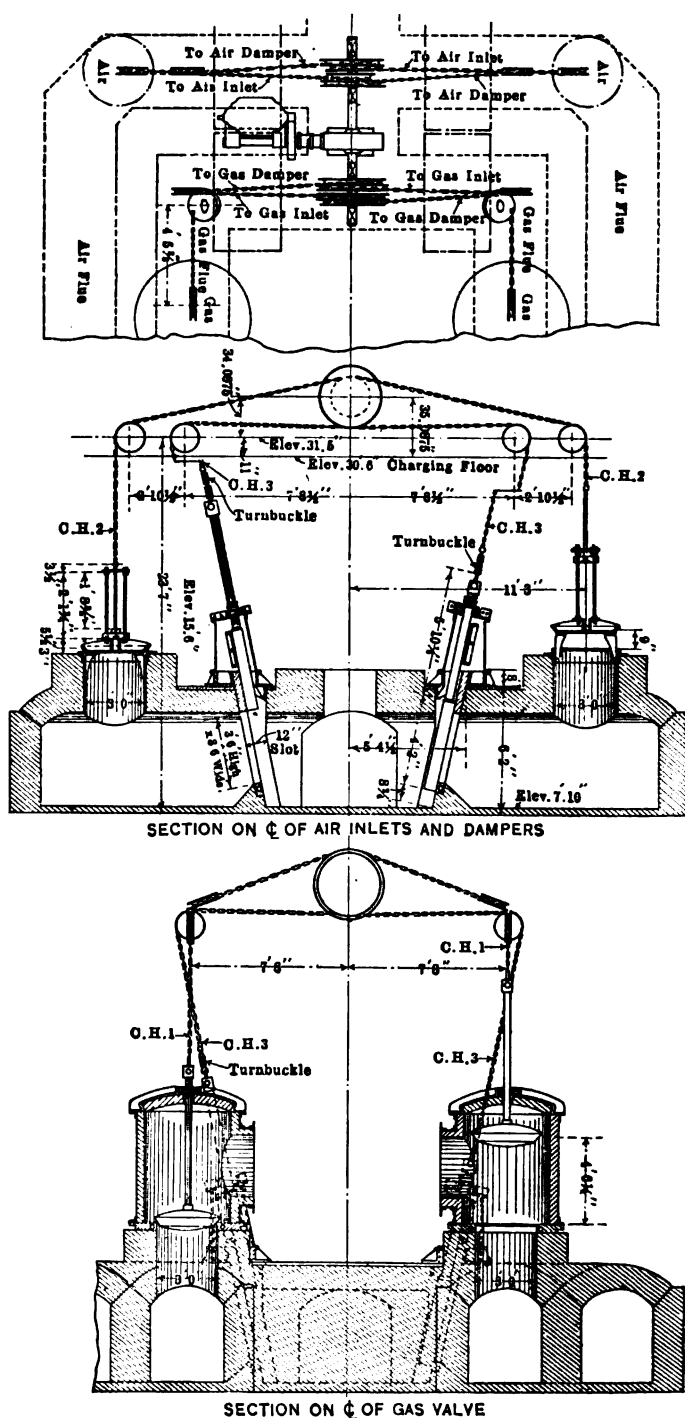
ARRANGEMENT OF KNOX PATENTED REVERSING VALVES.
